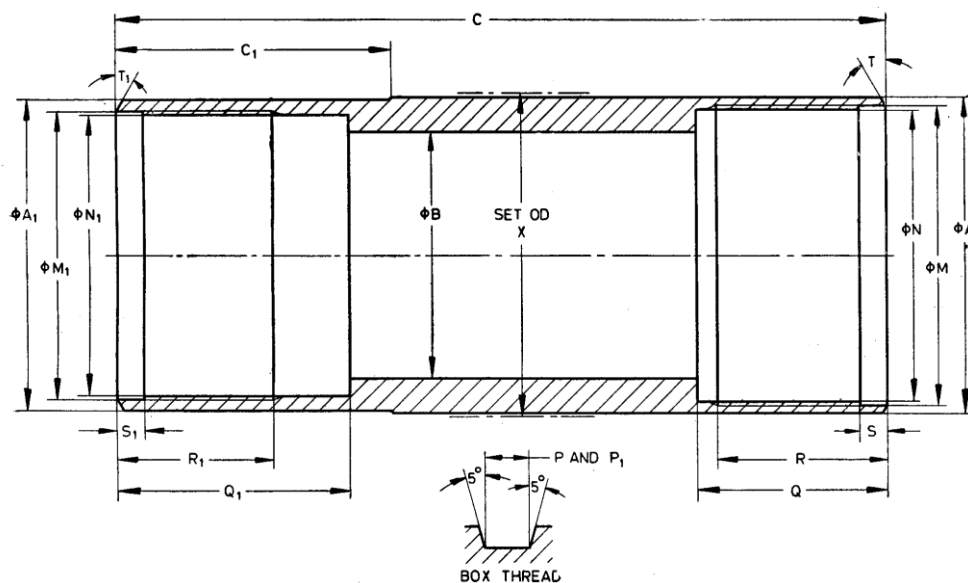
'WT' DESIGN SINGLE TUBE CORE BARREL — REAMING SHELL
